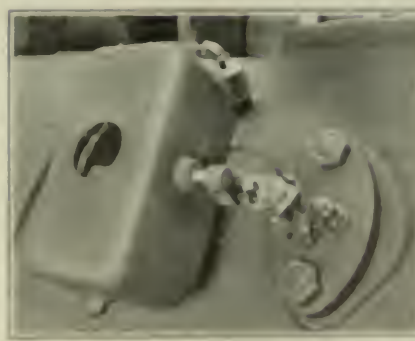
WATER AND GAS VALVE FOR CONTROL OF ENGINE.
